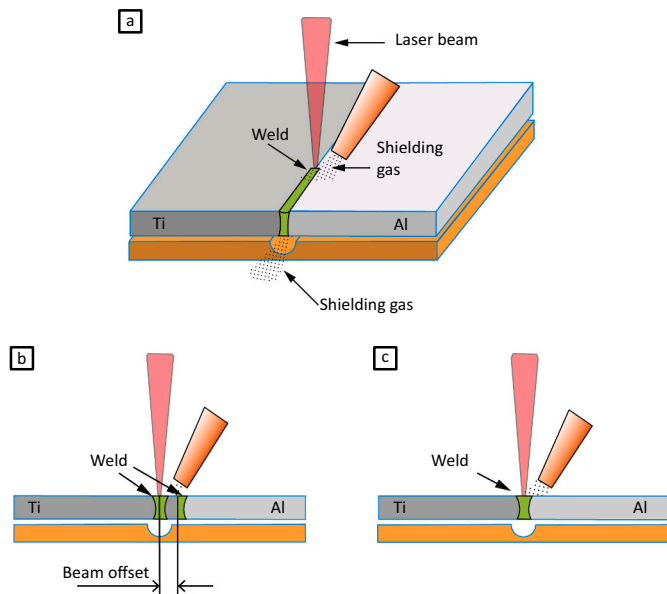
Scheme of the welding process: a – gas shielding system, b – welding-brazing with the beam offset, c – conventional welding without the beam offset.
